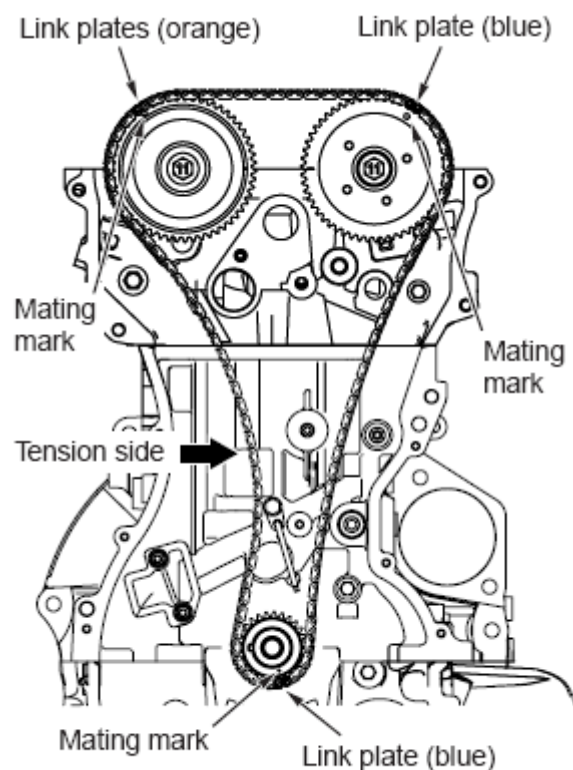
Identifying Timing Marks Of Camshaft Sprockets And Crankshaft Sprocket
